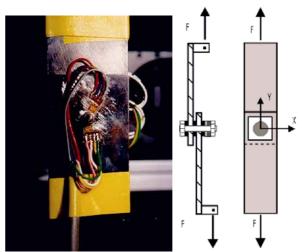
View of a shear tensile specimen with simulated spot weld. The drawing shows the coordinate system and the measuring field for a specimen with 9 mm cross bar similar to a bolt or rivet.
